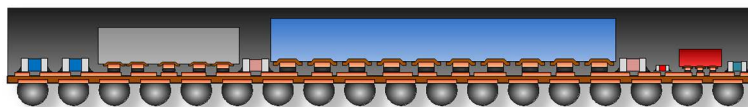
Multi-Die eWLB Fan-Out with passive components. [14]
